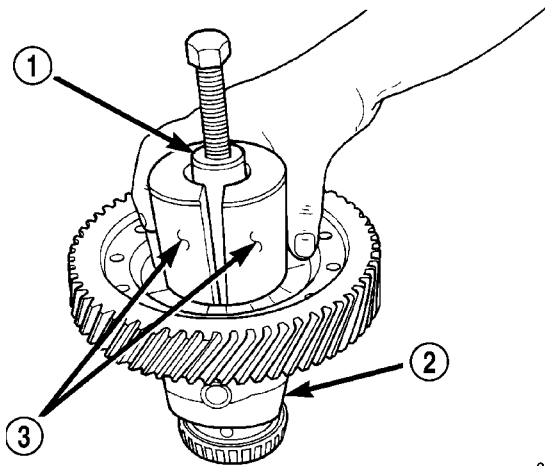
Position Tool 5048 Over Button and Collets at Differential Bearing (Ring Gear Side)
